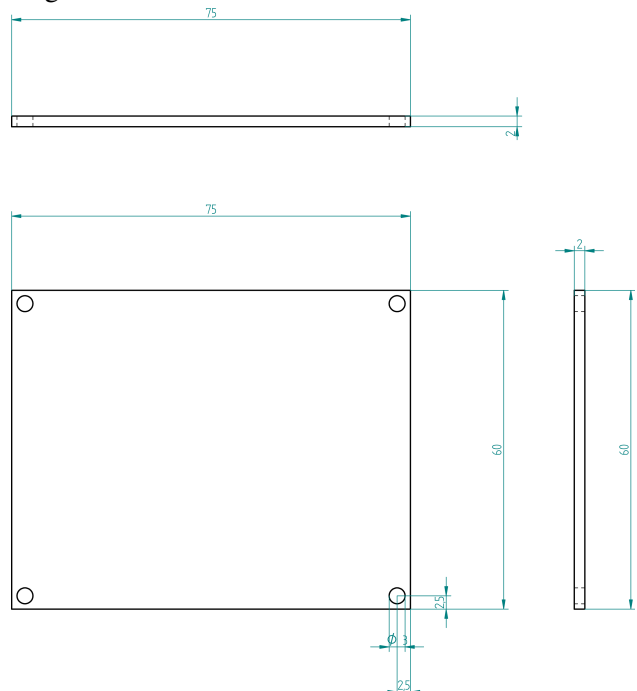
This technical drawing illustrates the front plate needed for keeping animals outside the device.
